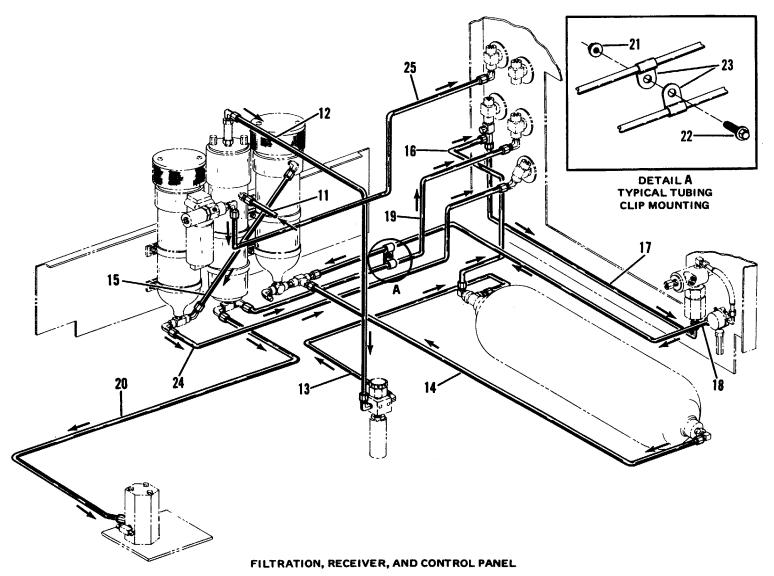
Air lines, hoses, and fittings (sheet 2 of 5)
